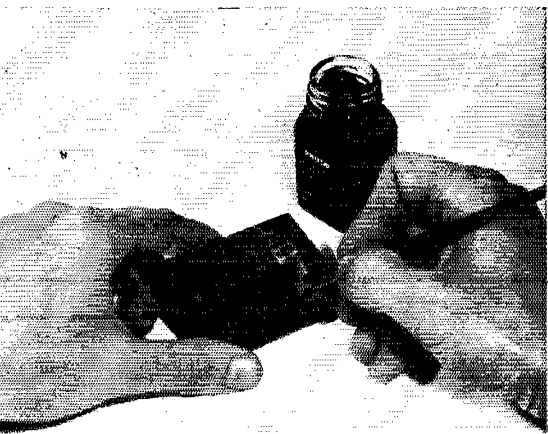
Paint the frisket "resist" over your traced outline. Unpainted areas will be removed by the etchant.
